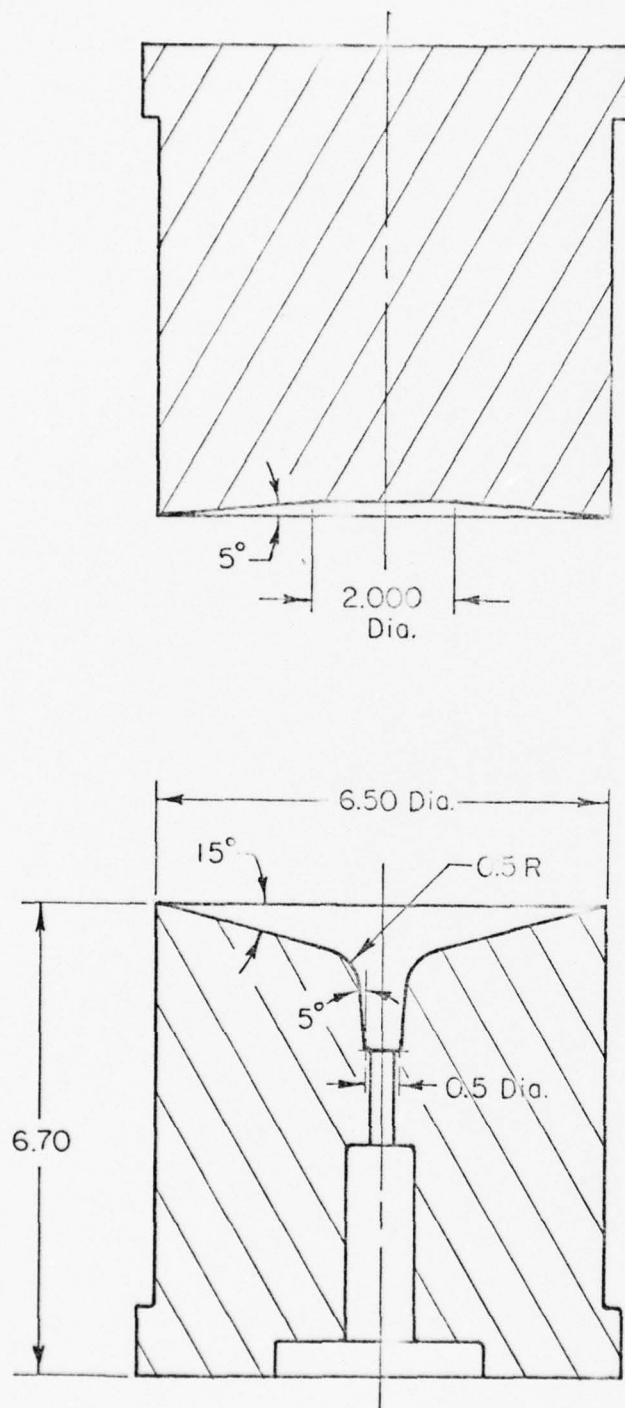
DIES FOR EXTRUSION FORGING TRIALS
